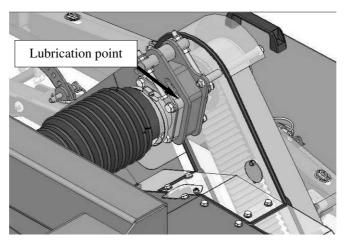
Non-locating bearing lubrication point on conditioner and shafts to be lubricated with grease ŁT 43
